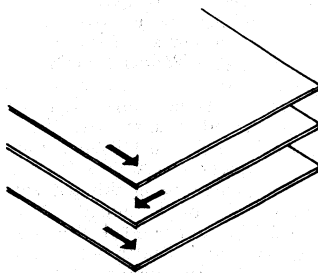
TYPICAL THIN PLYWOOD CONSTRUCTION
